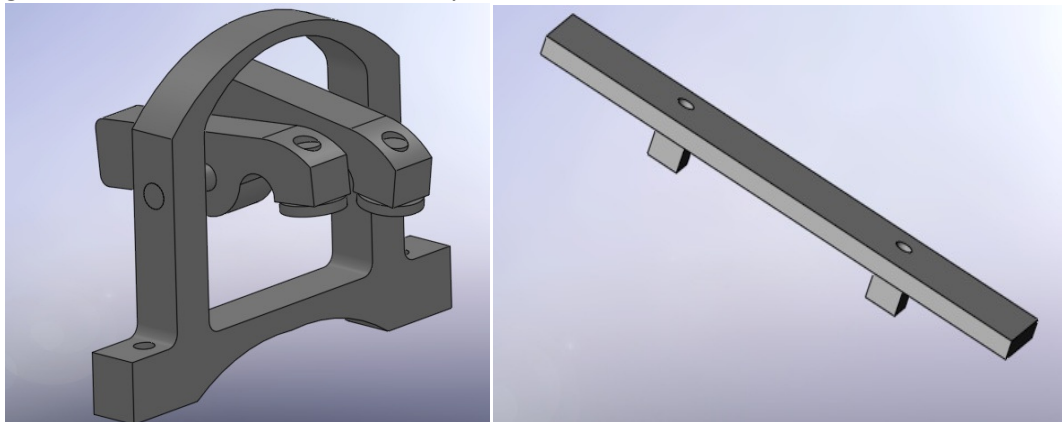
Rocker arm assembly (left) Cam shaft support (right)
